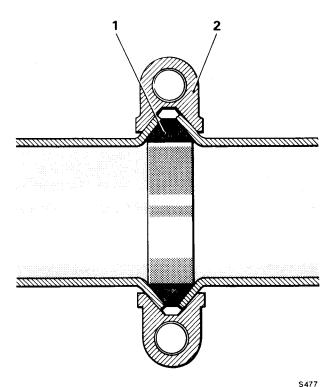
FLARED EXHAUST PIPE - SPHERICAL JOINT
